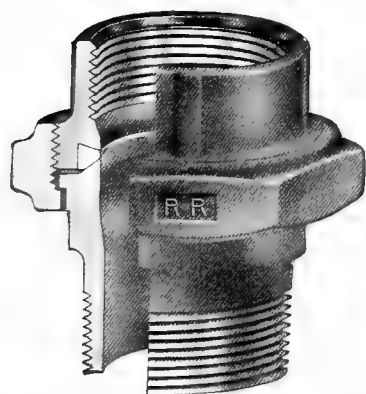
Crane Union with Outside and Inside Thread. The Crane Company.
